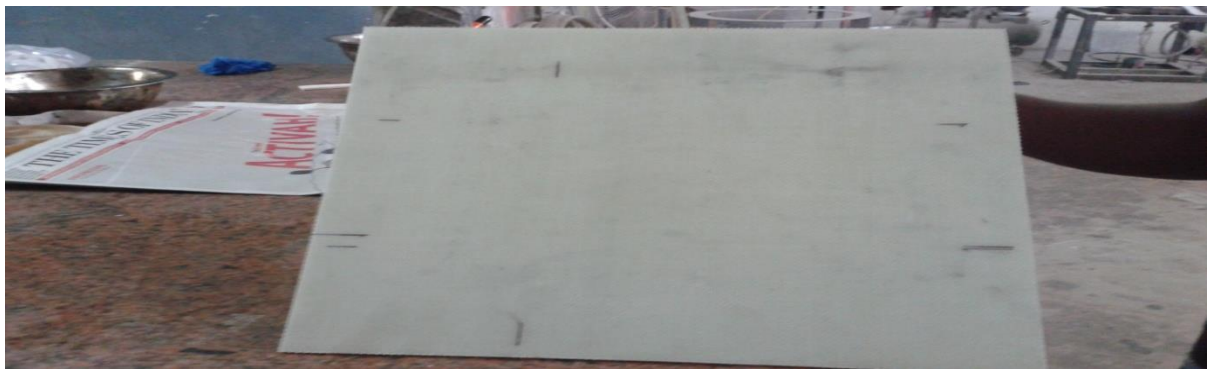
Manufactured sheet of dimensions 300x300x4mm
